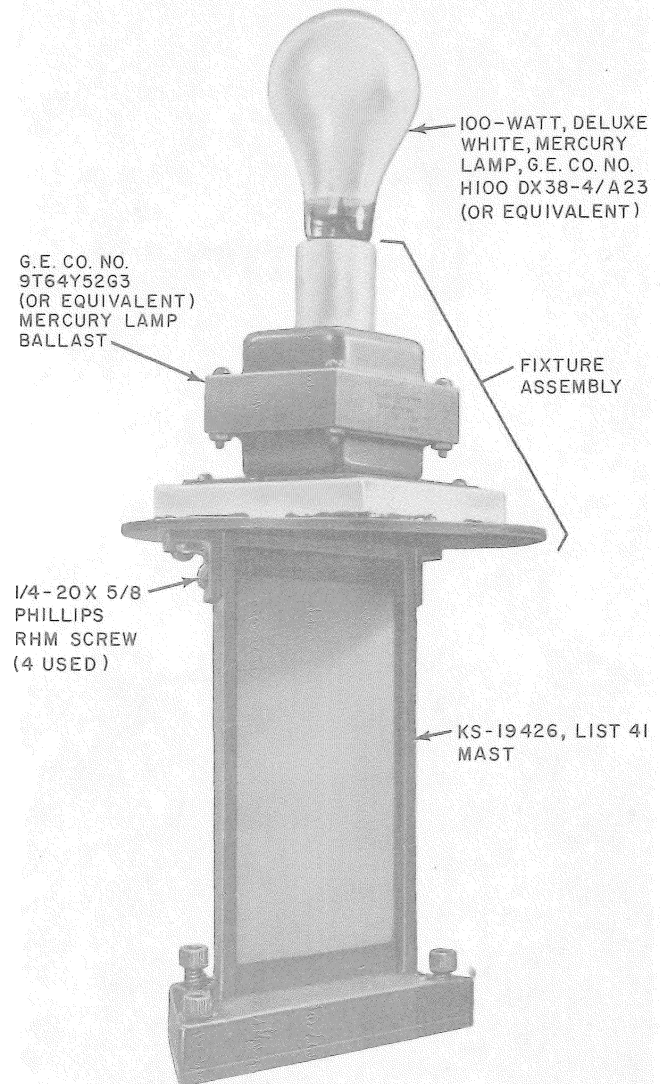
KS-19426, List 41 Mast with Fixture Assembly and Lamp Installed
